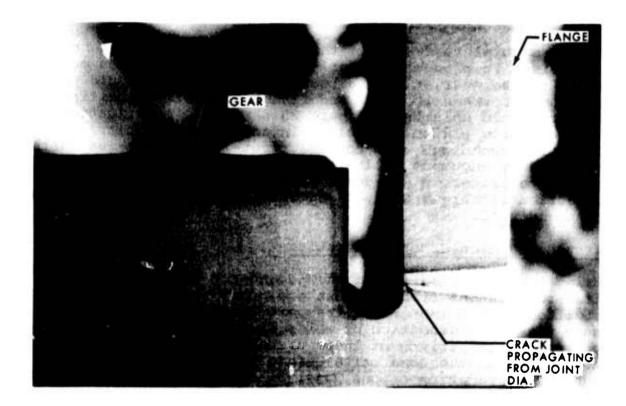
Crack - Gear/Flange Assembly, Second-Row Pinion.
